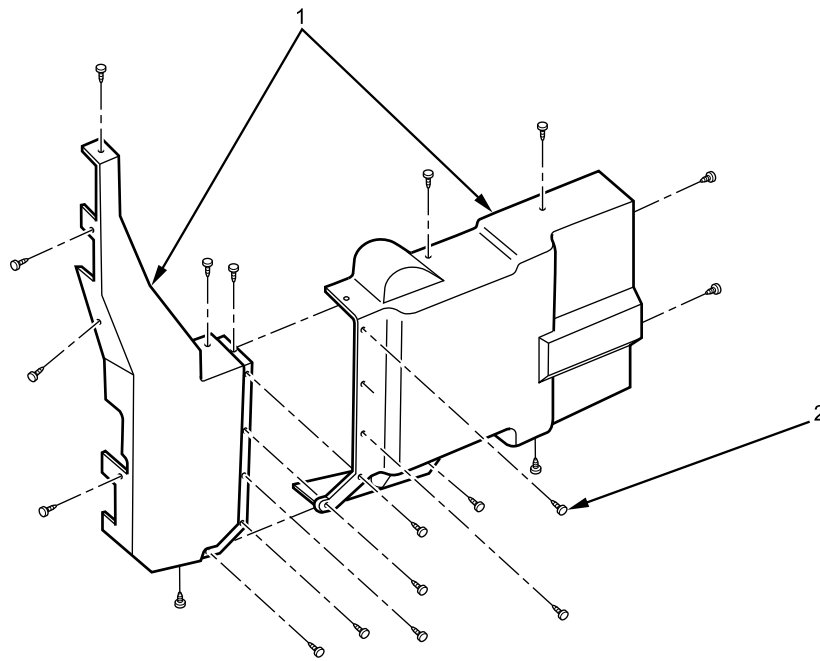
Cabin Door Trim Panel Fasteners Removal.
